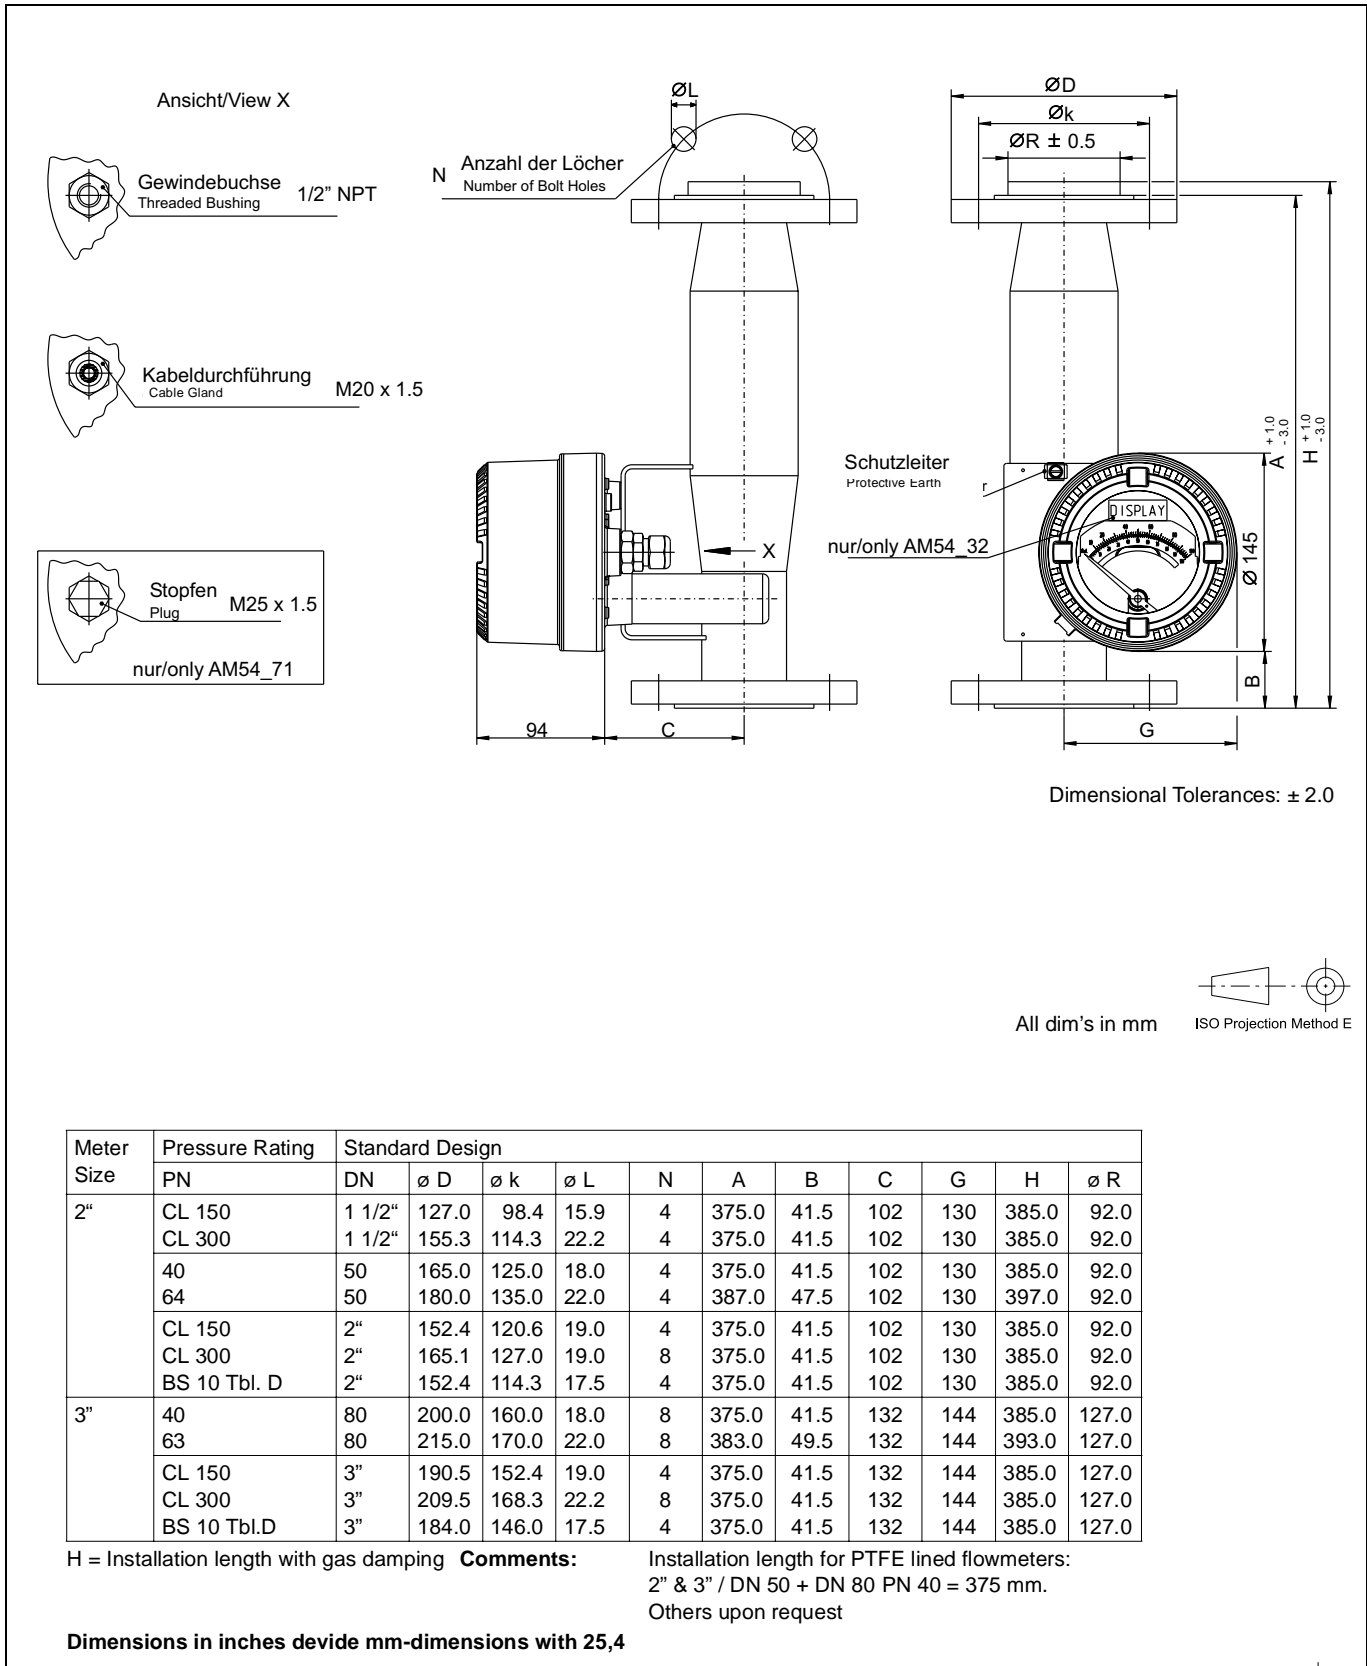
Dimensions and Connections for Installation Length 375 mm (Standard Design)t
